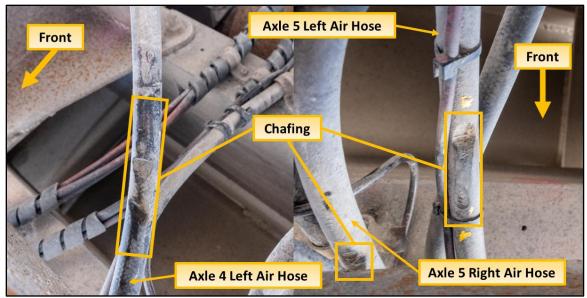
Chafing of air hoses to air hoses to axle 4 and axle 5.
